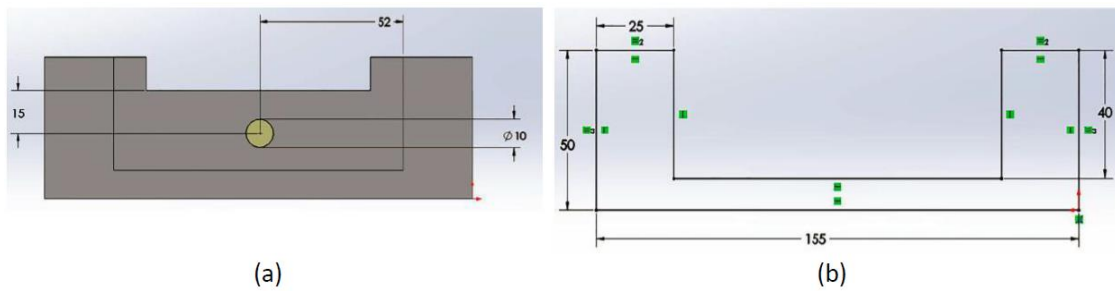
The geometry of the CNC milling machine bed: (a) rear section, (b) front section (Kumar et al., 2022)
